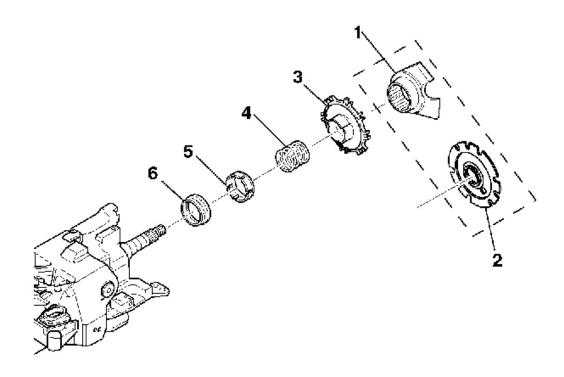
View Of Turn Signal Cancel Cam, Upper Bearing Inner Race & Components
